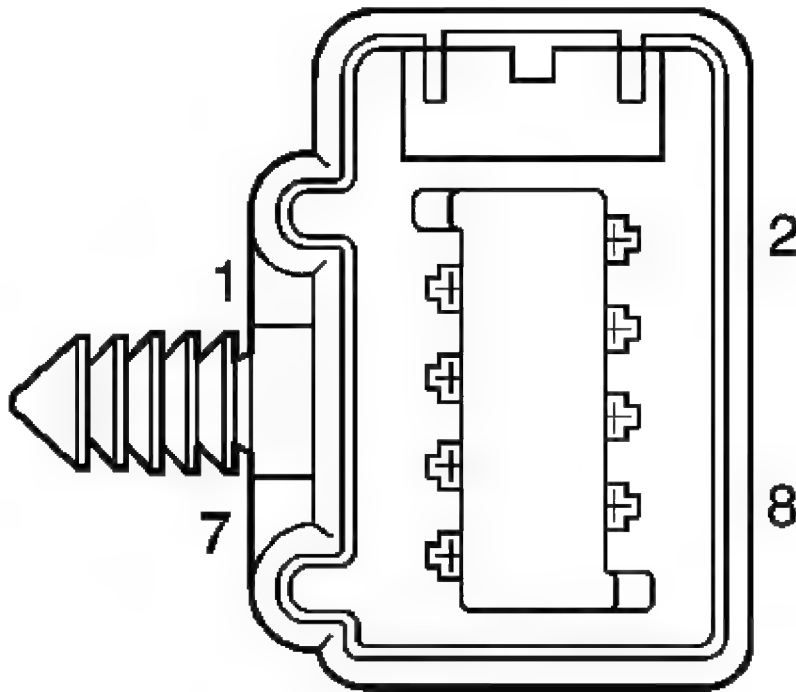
Driver Seat Cushion Ventilation Heat & Cool Module (KB6) Connector End View
